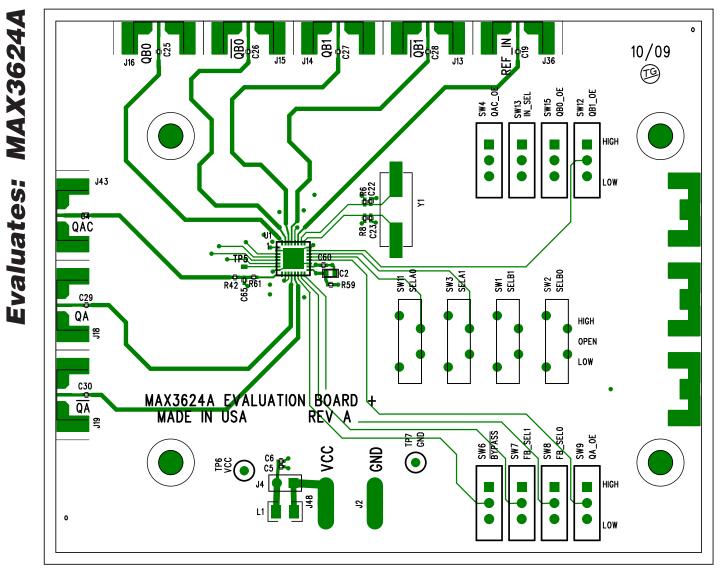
MAX3624A EV Kit Assembly Drawing—Top Side
